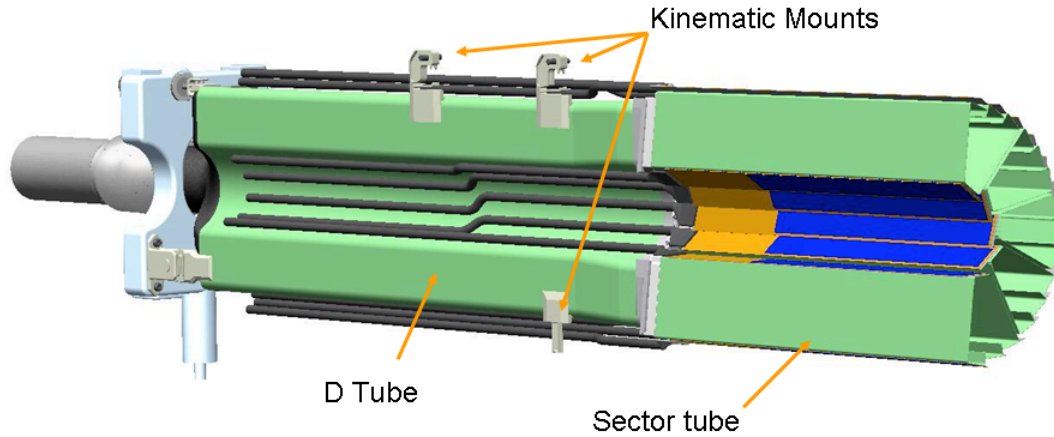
Half module consisting of 5 sector beam modules. The sector beam modules are secured to a carbon composite D tube using a dovetail structure, which permits easy replacement of sector modules. Carbon composite parts are shown in green for greater visibility.
